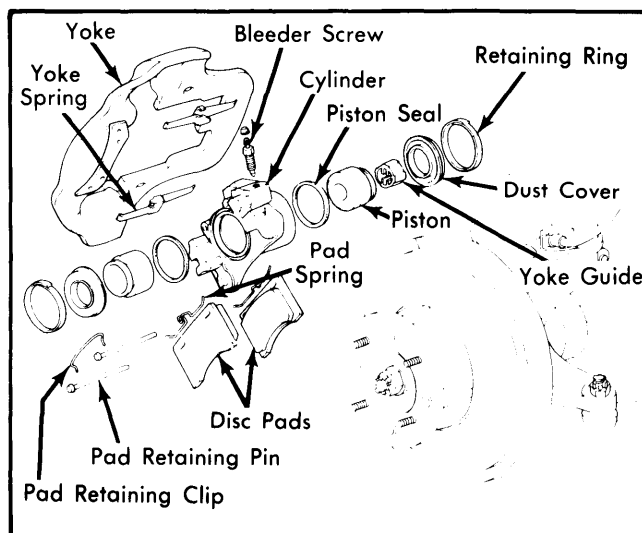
Disc Brake Assembly for Civic and CVCC Sedan
